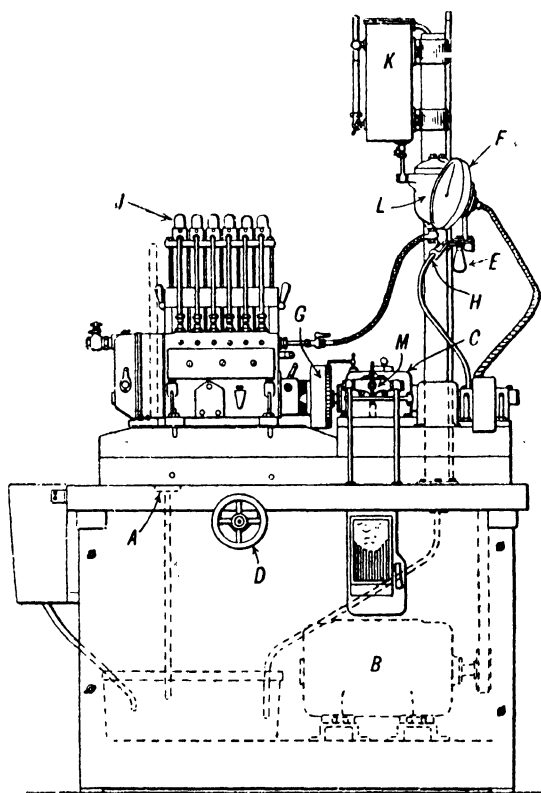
The C.A.V. fuel-injection equipment testing apparatus.
